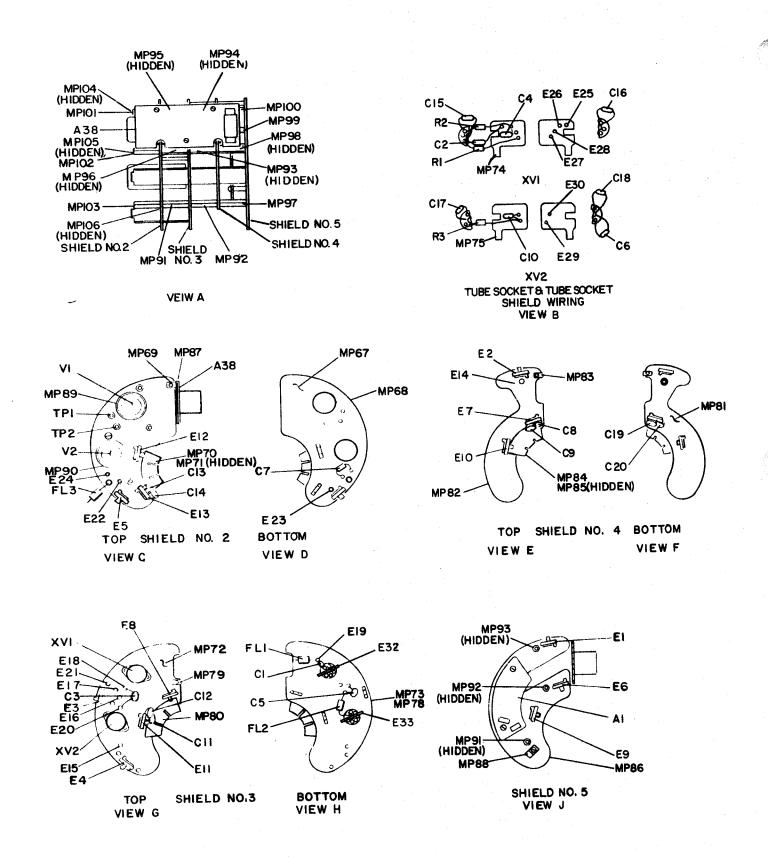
RF Chassis Assembly (P/O A2A4), Component Locations
